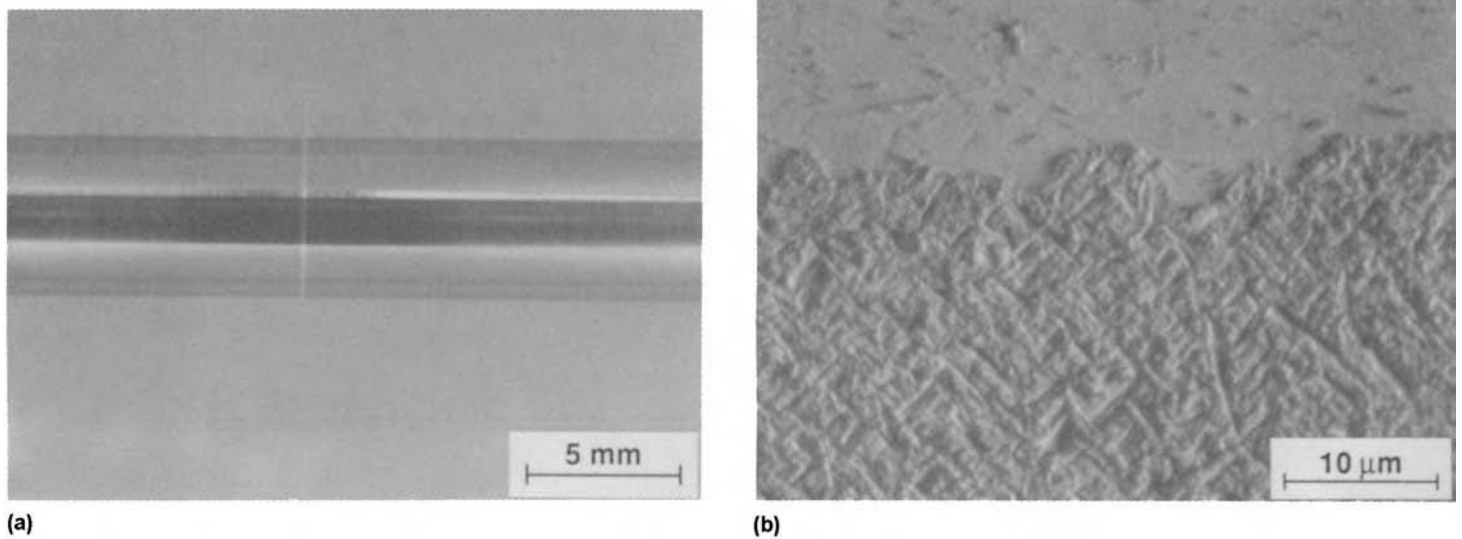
(a) Optical photograph showing a 150 μm (6 mils), thick silver interlayer joining steel base metals and (b) optical micrograph of the solid-state-welded interface. Source: Ref 17
